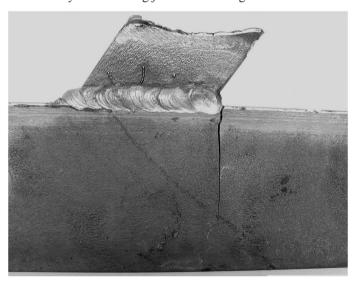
Fracture in a welded steel structure close to L profile weld.
